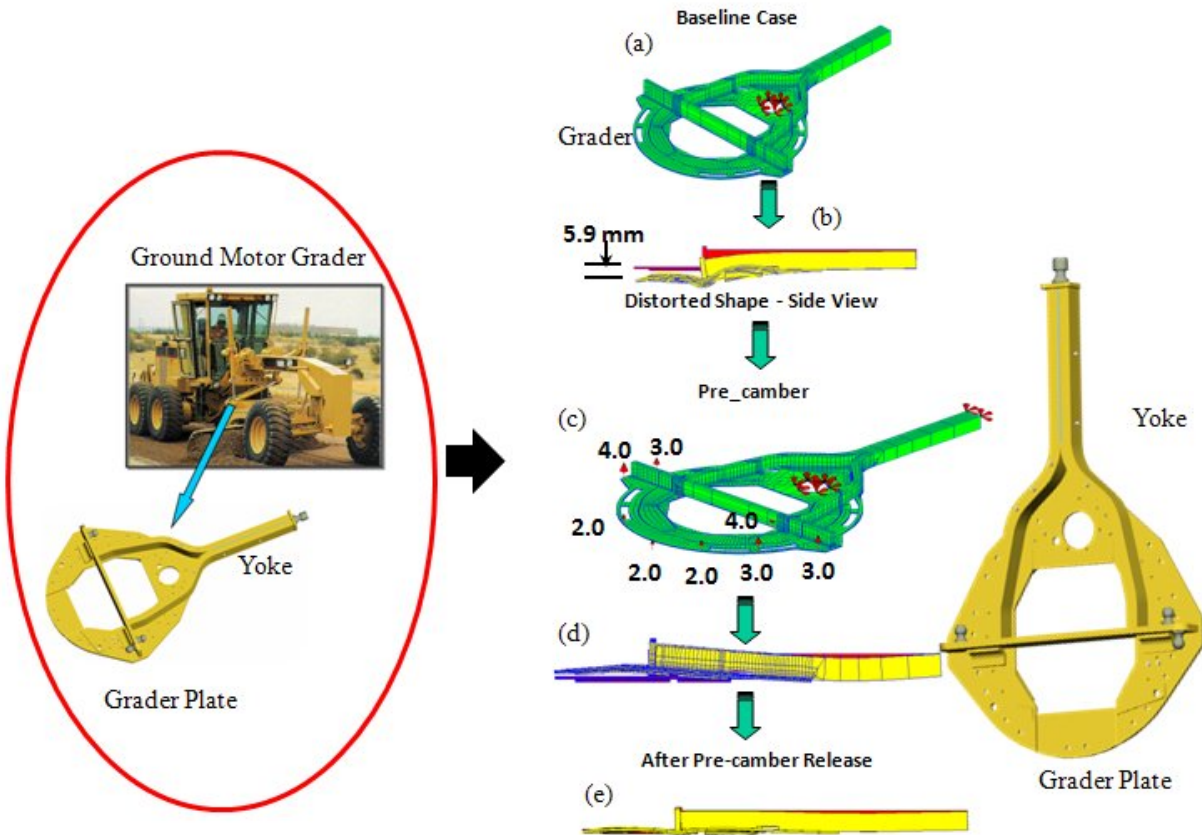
Motor Grader Weld Distortion Control Example
